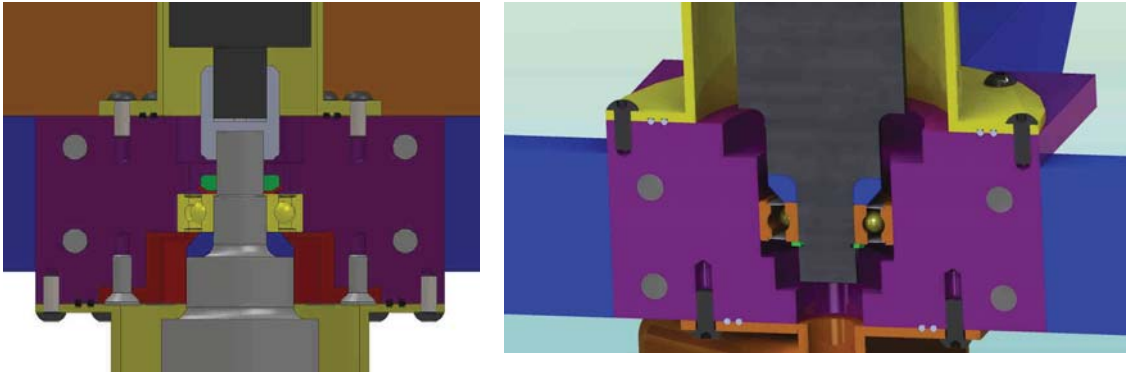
Flywheel bearings: on the left the upper bearing, on the right the lower bearing.
